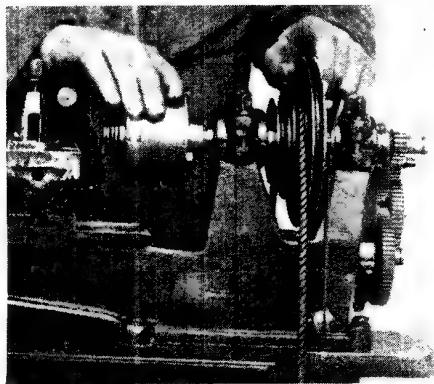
Here the operator is screwing a self-centring chuck on to the mandrel nose
